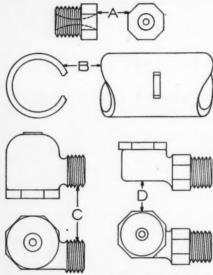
Types of Nozzles Used on Parts Washing Machine. (a) Venturi Jet. (b) Plain Slotted Pipe. (c) and (d) Nozzles Designed to Deliver Full Spray at Relatively Low Pressures.
